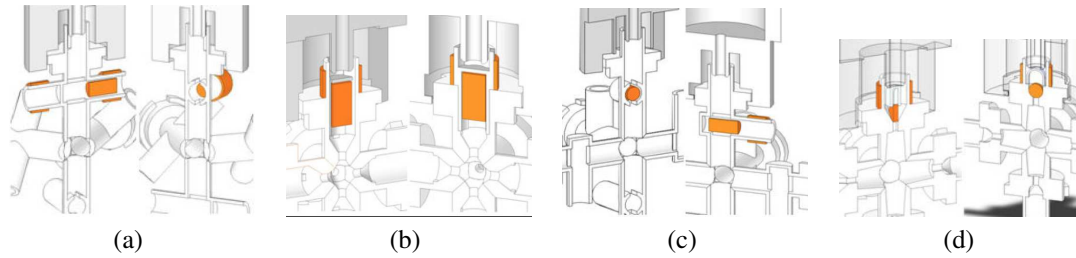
Drawings of selected solenoid valve concept designs. (a) Cylinder magnet travelling orthogonally to flow actuated by two independent coils for opening and closing respectively. (b) Cylindrical magnet in line with fluid flow, requires constant current through coil to overcome fluid drag forces to remain in open position. (c) Cylindrical magnet travelling orthogonally to fluid flow, actuated by one coil for both opening and closing. (d) A disk magnet in line with fluid flow requires constant current through coil to overcome fluid drag forces to remain in open position.
